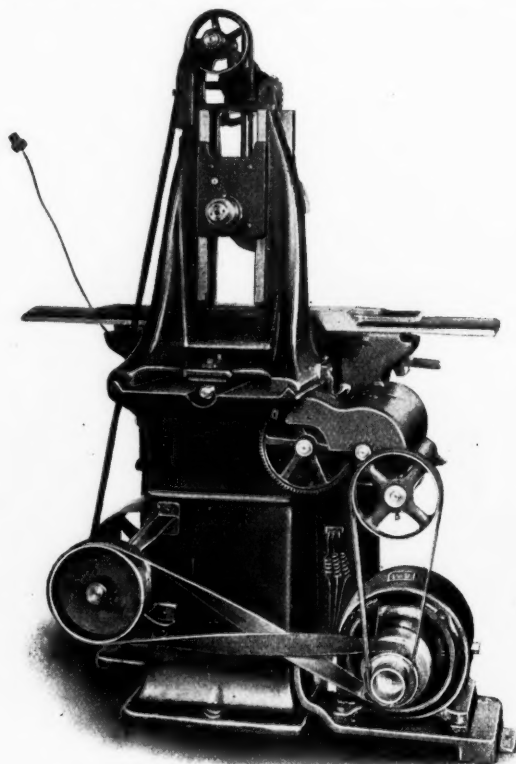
Rear View of Grinder showing Wheel and Feed Driving Connections.
